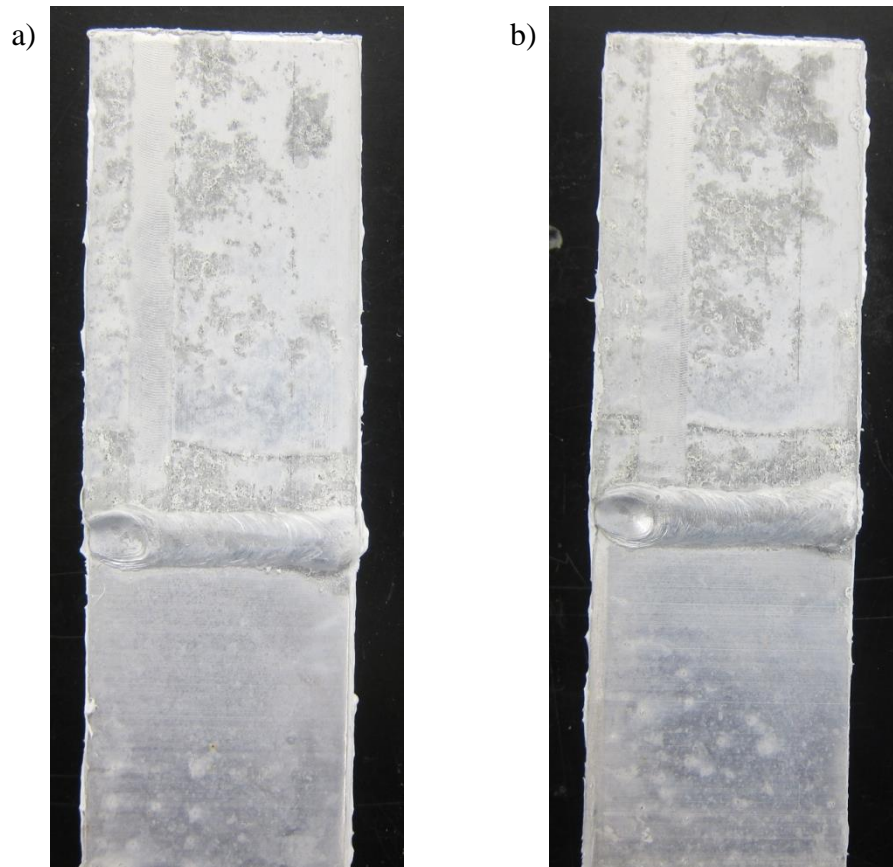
Duplicate samples of lap-joint welded configuration C3 (ER5356/AA7108/L) in the as-welded T6+PB condition.
